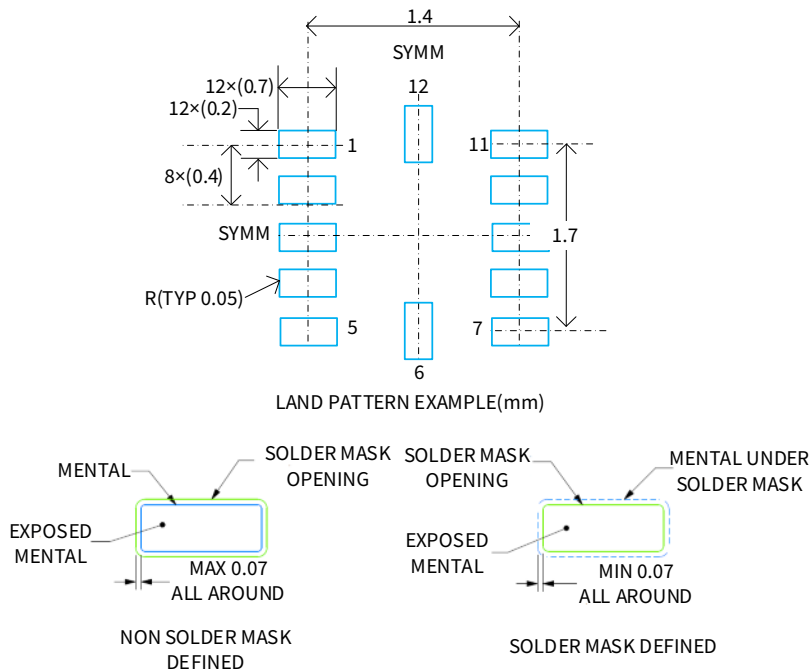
UQFN12 package board layout example for NCAB0104-Q1QBDR
